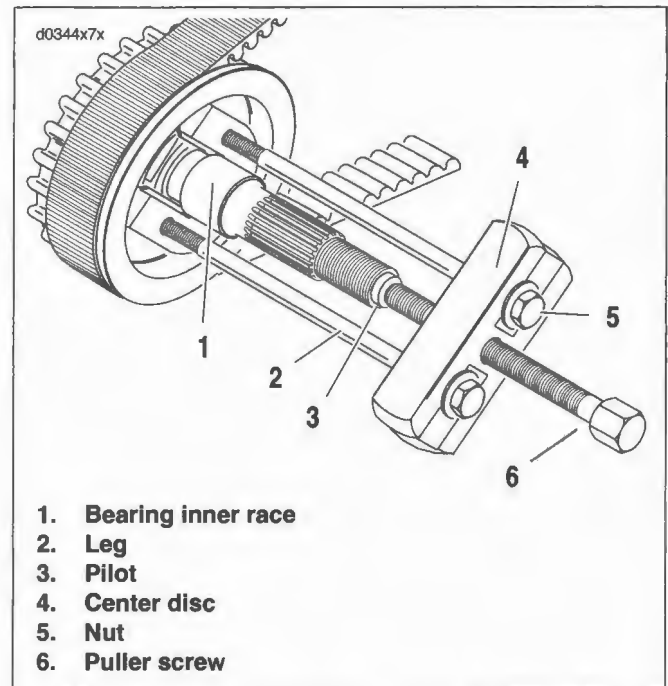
Pulling Mainshaft Inner Bearing Race
